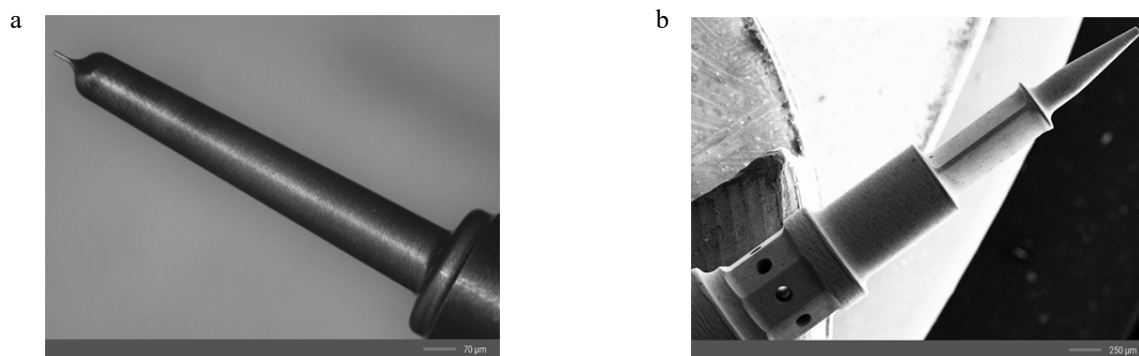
(a) Laser turned ejector with a length of 9mm and end piece diameter of 40µm made of carbide; (b) Combination of laser turning, drilling and cutting processes with one clamping operation
